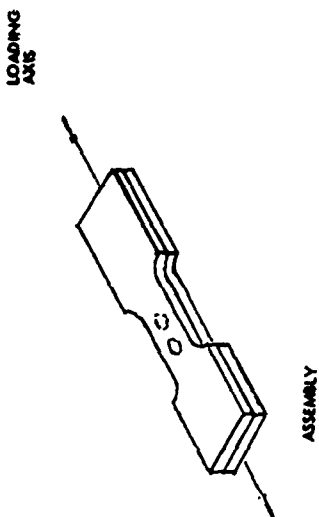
Specimen Detail, Low Load Transfer Test Specimen Joint
